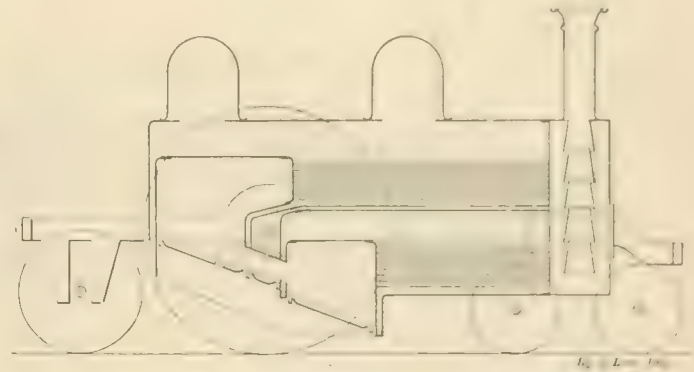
COLBURN'S DESIGN OF LOCOMOTIVE DOUBLE BOILERS, WITH DRIVING AXLE BETWEEN.
